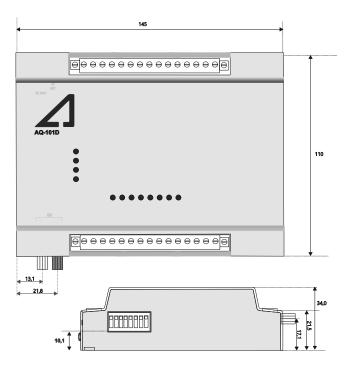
AQ101D device dimensions, all dimensions in millimeters.
